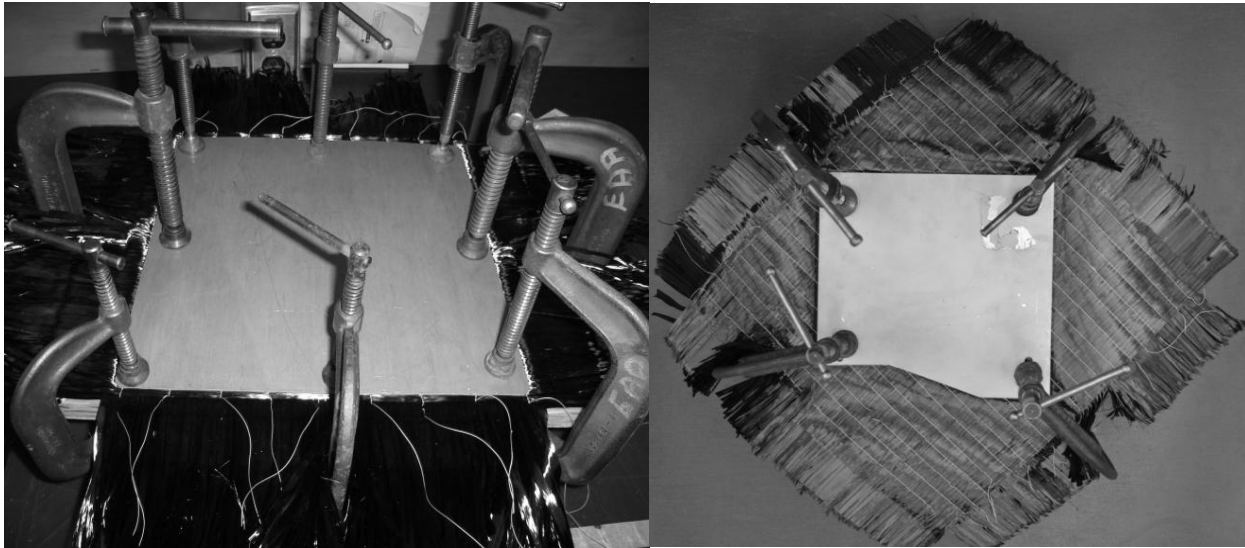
Clamped stitched dry preforms, ready to be cut
